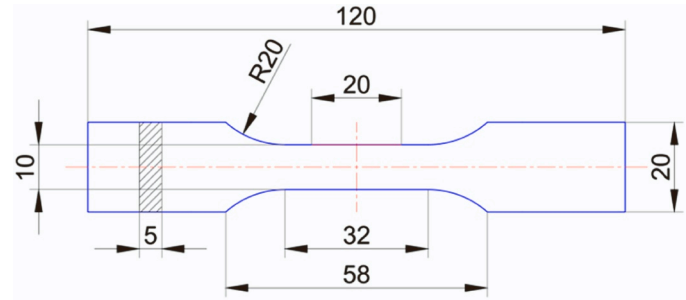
Dimension of flat tensile test specimens 1AV [mm].
